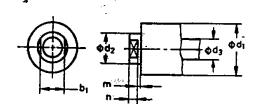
SPINDLE END WITH ADDED END CAP, TYPE B
